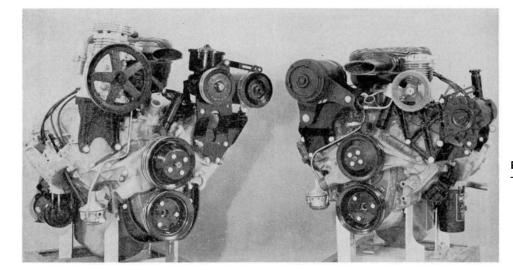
Mounting of compressors; left — truck engine, right — passenger-car engine
